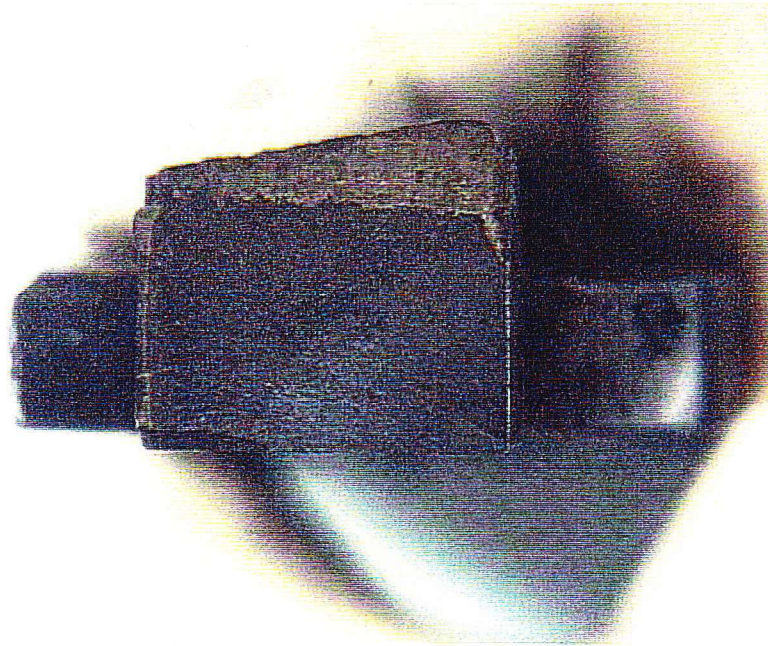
& 4: Detail of fracture surfaces of midspar fittings on the part from picture 2.
